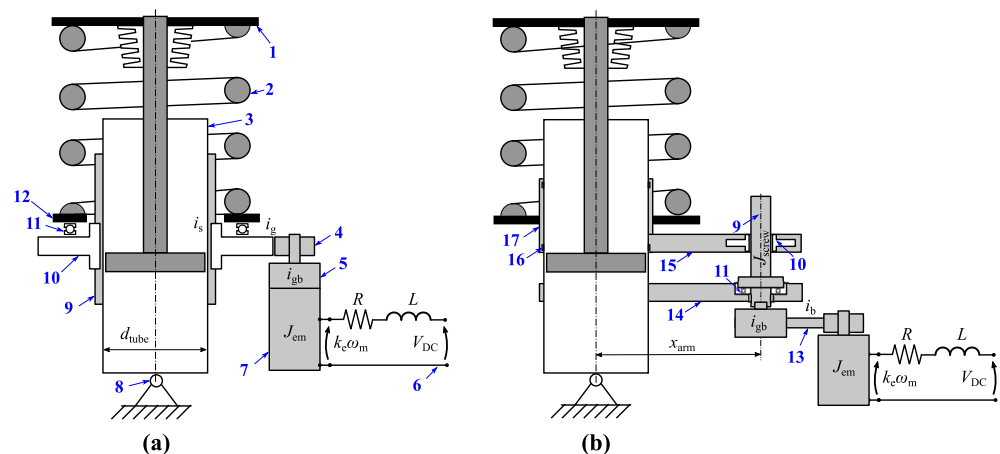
Different electromechanical height adjustment systems with lower spring holder actuation: (a) concentric [11] and (b) eccentric. Components: (1) upper spring seat, (2) spring, (3) shock absorber tube, (4) pinion gear, (5) gearbox, (6) onboard electric battery, (7) electric motor, (8) wheel hub, (9) power screw, (10) nut, (11) axial thrust bearing, (12) lower spring holder, (13) belt drive, (14) lower arm, (15) upper arm, (16) bushing, (17) guiding element. Note: Only additional or different elements are indicated with numbers for the eccentric system.
